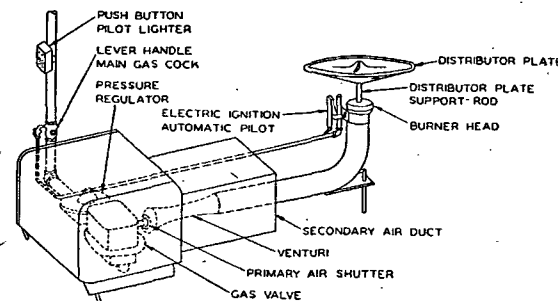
TYPICAL SINGLE PORT GAS CONVERSION BURNER
